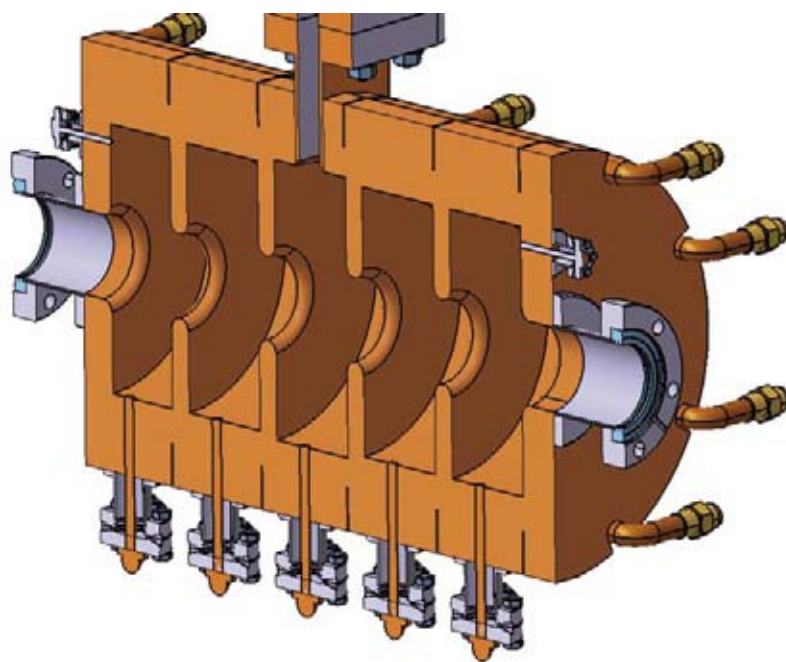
Technical drawing of the standing wave 5-cell deflector.
